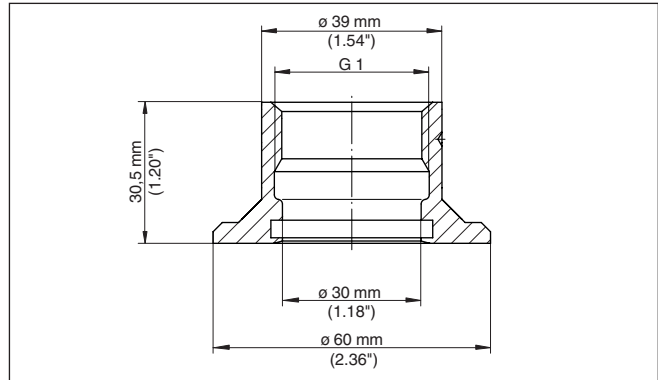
Dimensions of welded socket, G1 (DIN 3852-X) - suitable for foodstuffs
